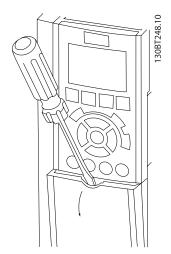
Control Wiring Access for A2, A3, B3, B4, C3 and C4 Enclosures
